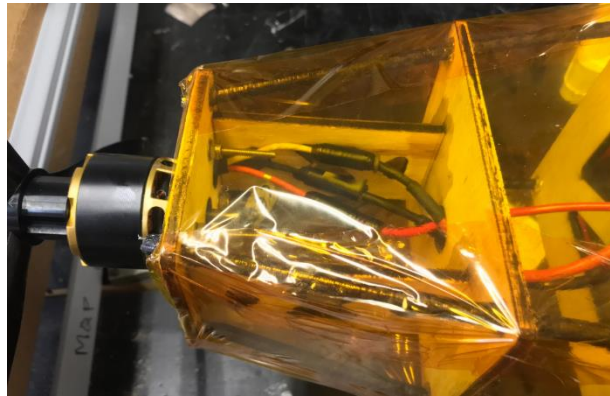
Front Engine Showing Carbon Fiber Spar/Bulkhead Construction Technique
